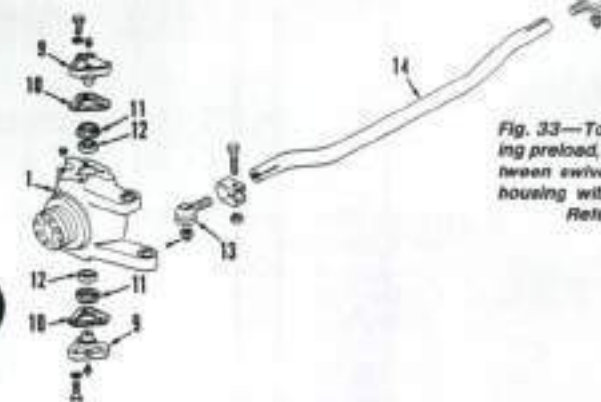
To set swivel bearing preload, measure gap between swivel pin and swivel housing with a feeler gauge. Refer to text.
